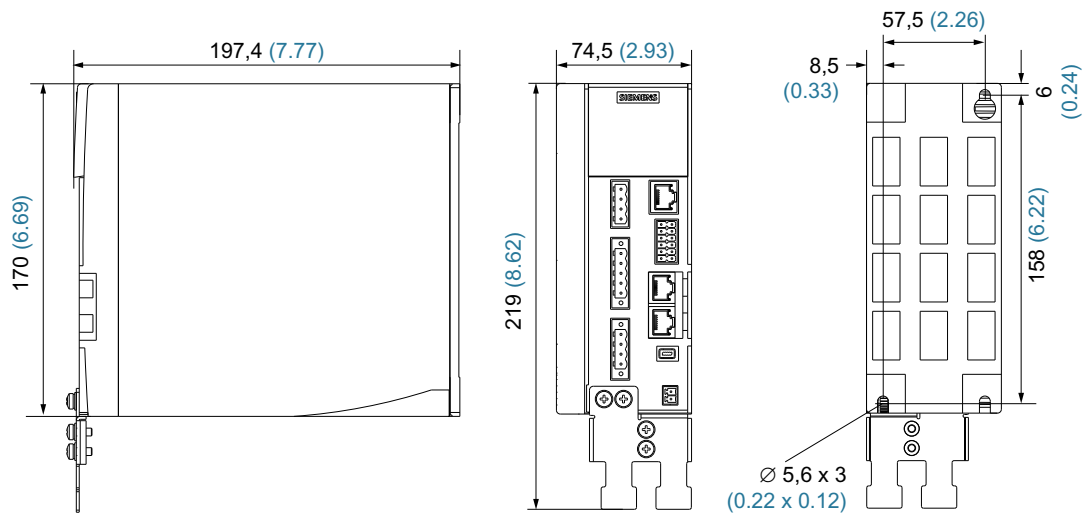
Dimension drawing SINAMICS S210 FSC, 1 AC, dimensions in mm (inch)
